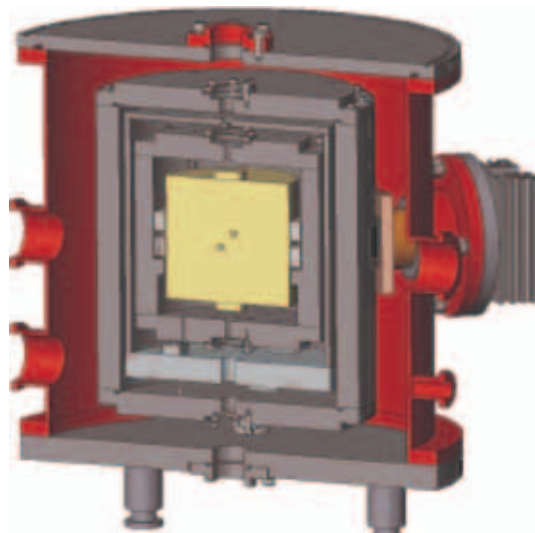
A sectioned view of the ultra-stable cavity assembly.
